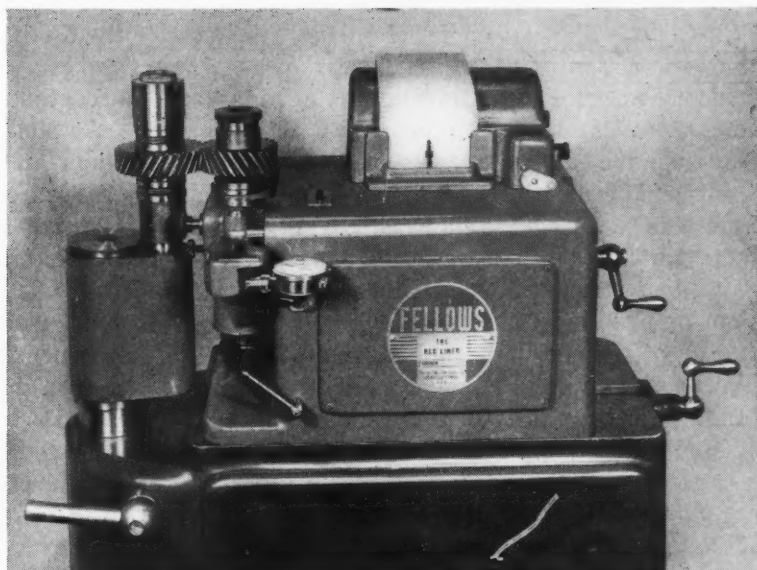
Fixture employed for checking the total composite error in bevel gears, performing speed tests on gears, and testing tooth bearing with the fixture set for the proper amount of backlash
